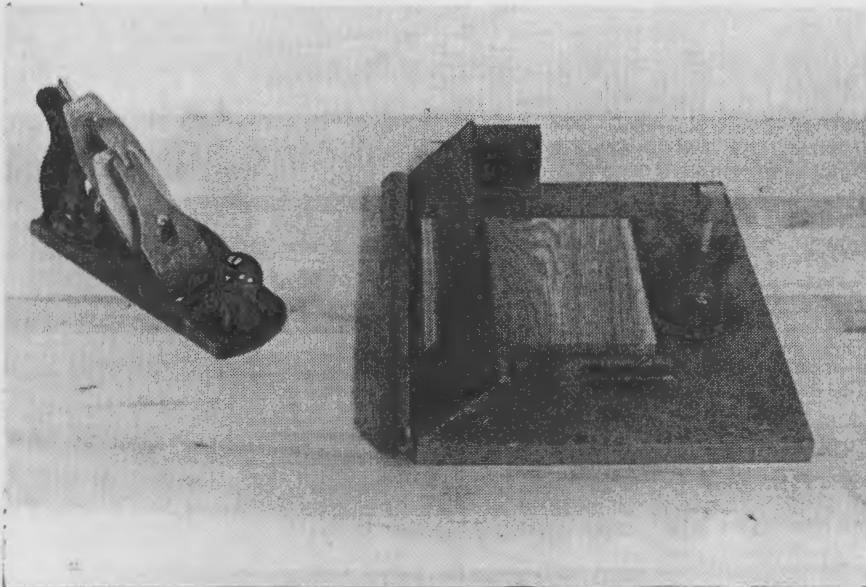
Figure I. The production worker used this hand plane and jig to perform the chamfering operation.
